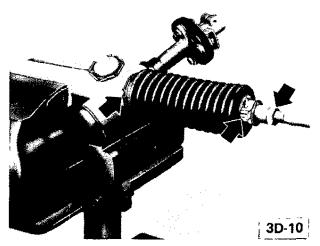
D-10 Removing Tie Rod Ends from Axial Joint
